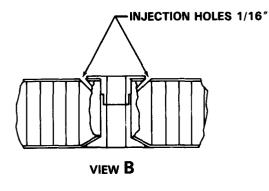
Honeycomb Panels – Installation of Inserts (Sheet 3)
